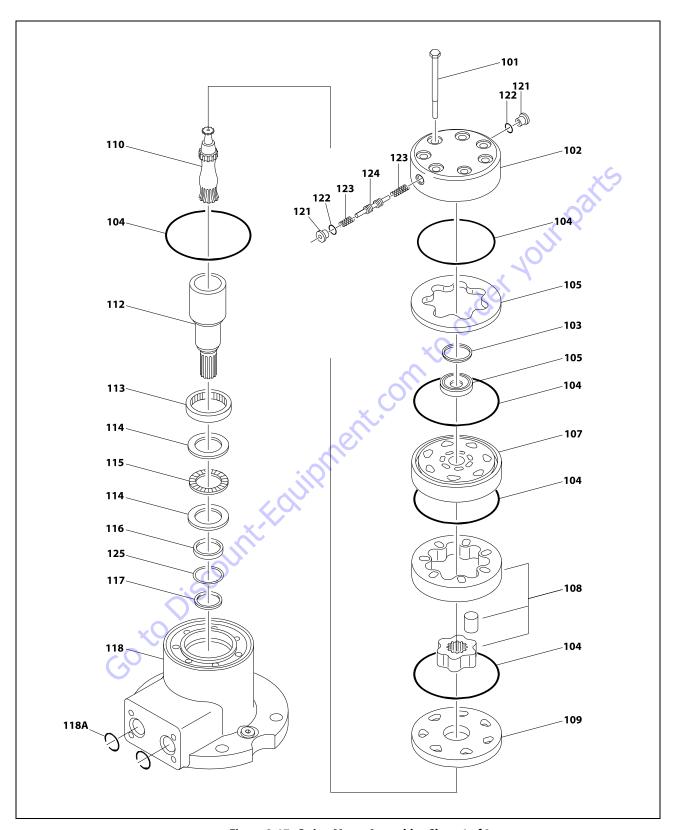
Swing Motor Assembly - Sheet 1 of 2
